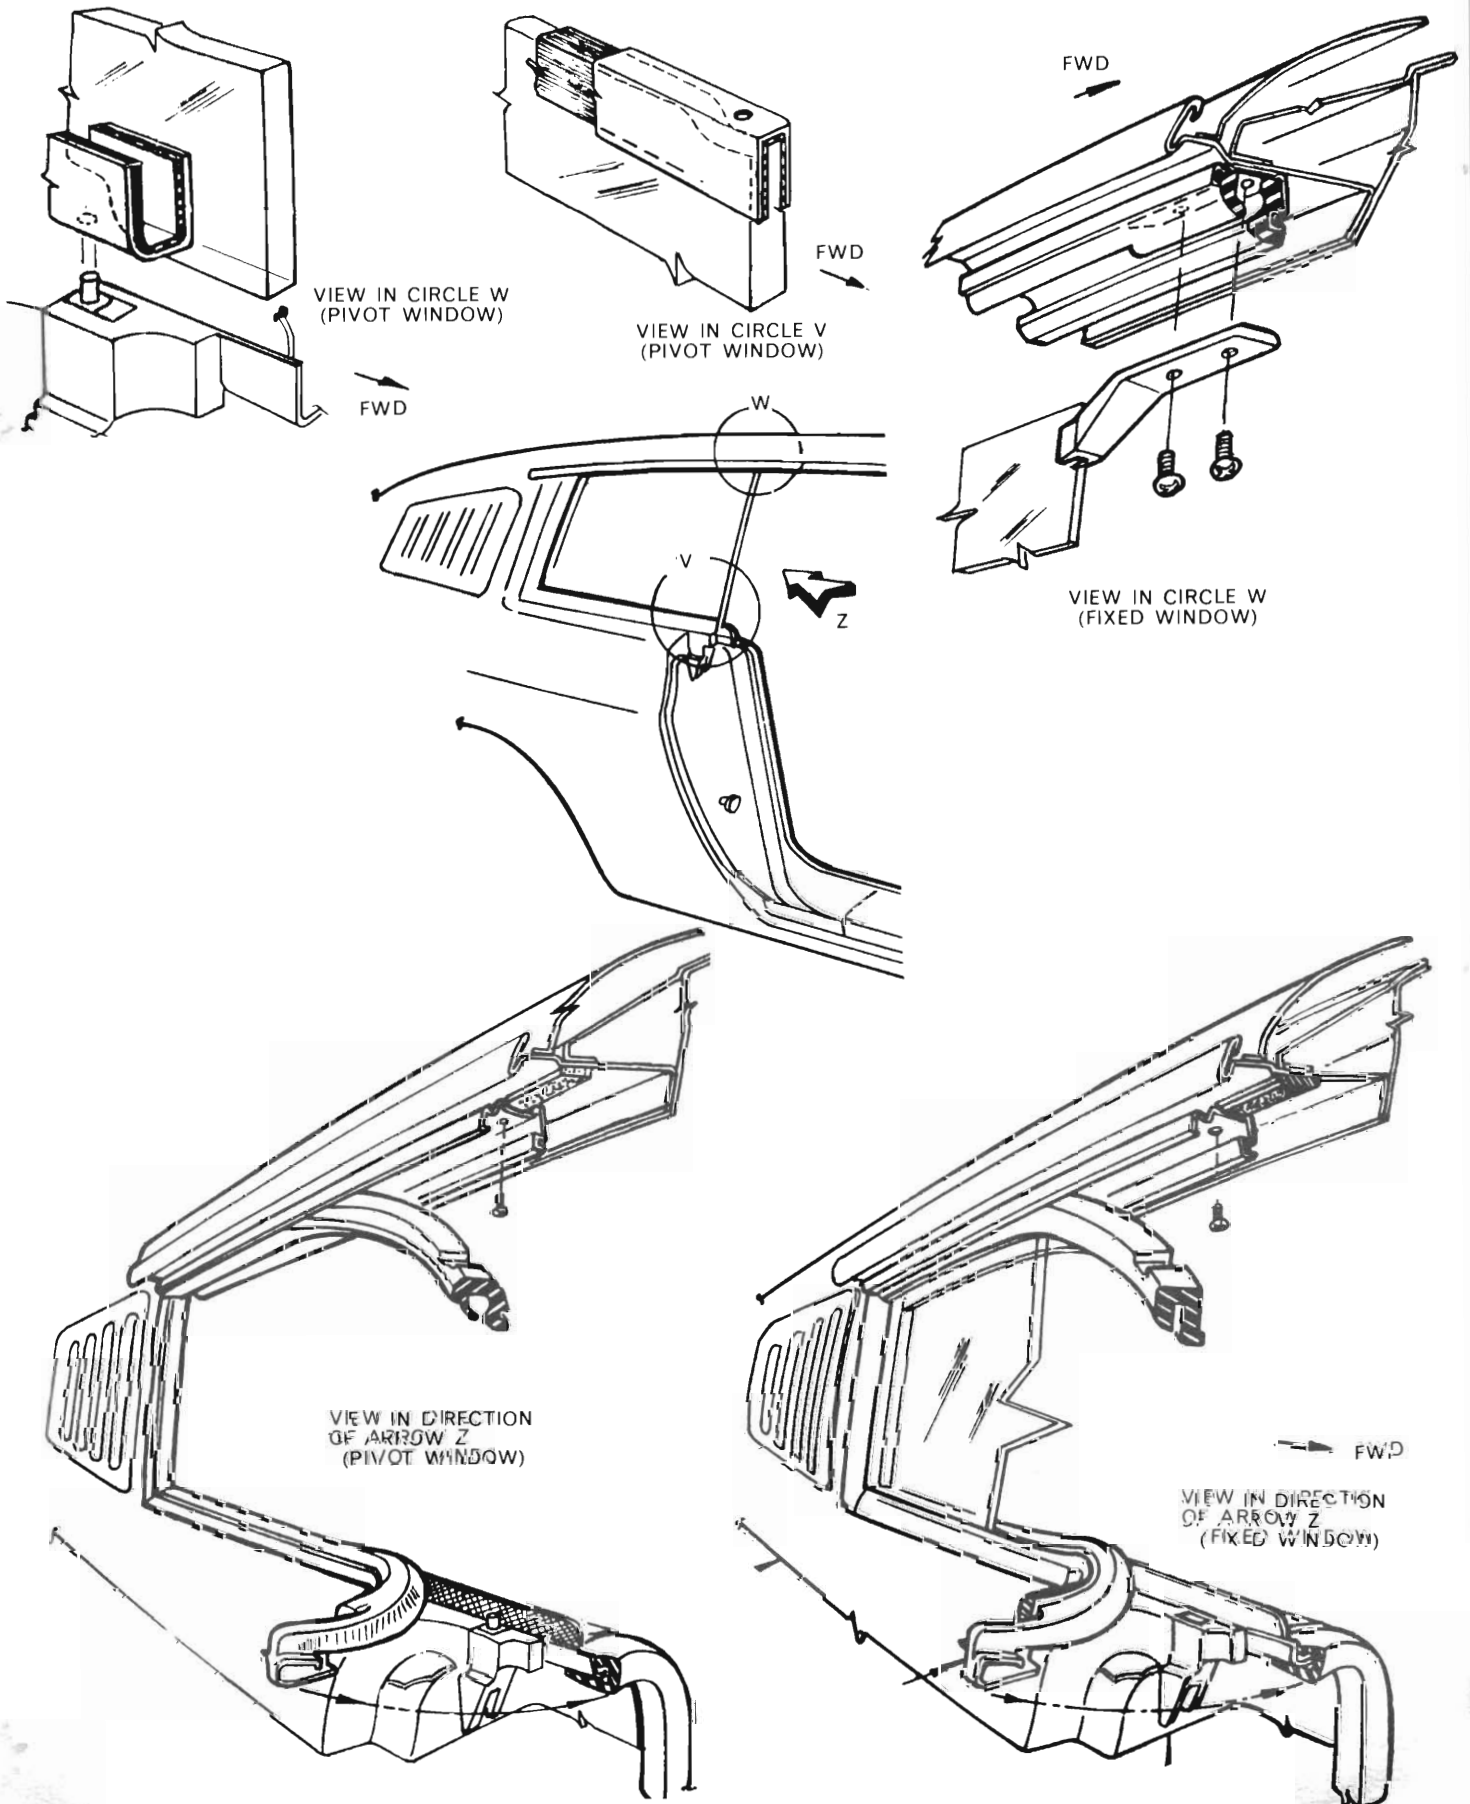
Charger Read Quarter Window (Hinged & Fixed)
